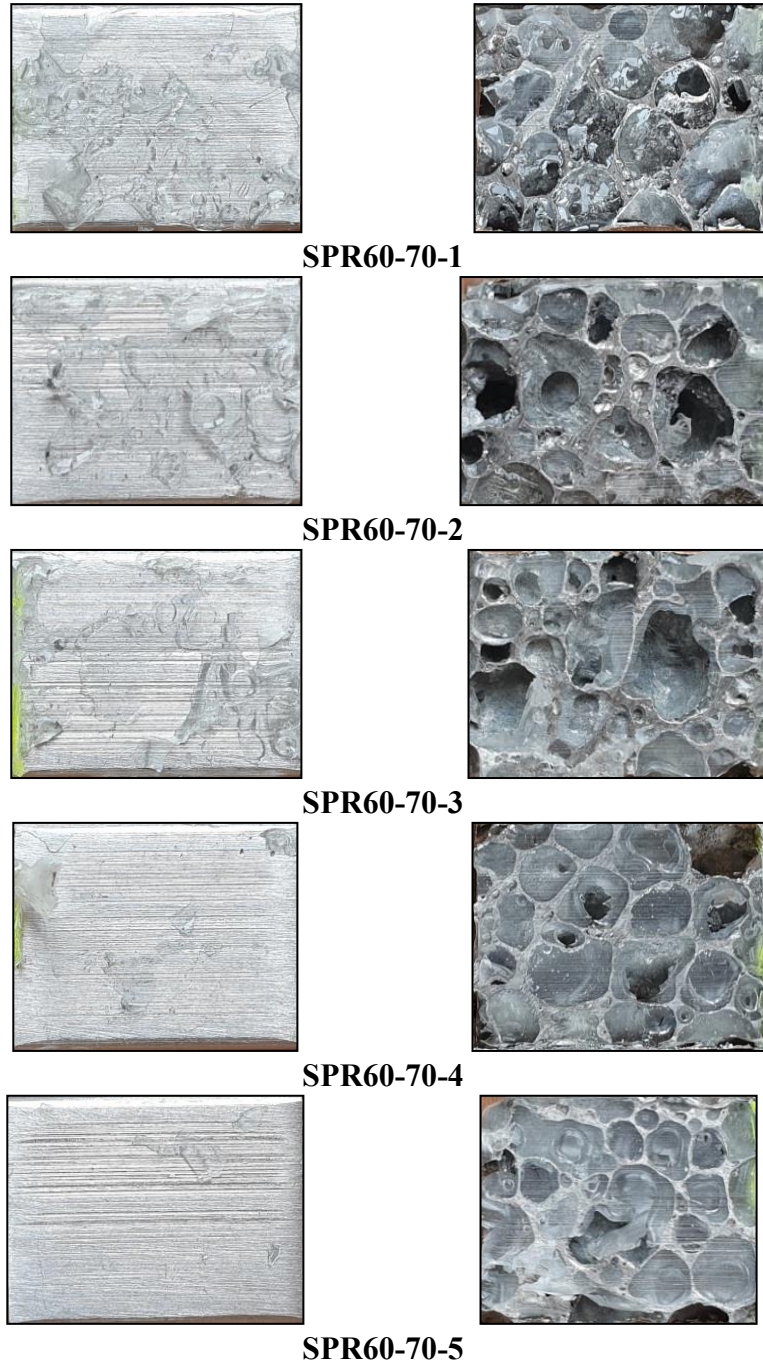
Bonding Surfaces of Aluminium Block and Specimens with Surface Porosity Ratio 60-70% (SPR60-70) after Shear Test.
